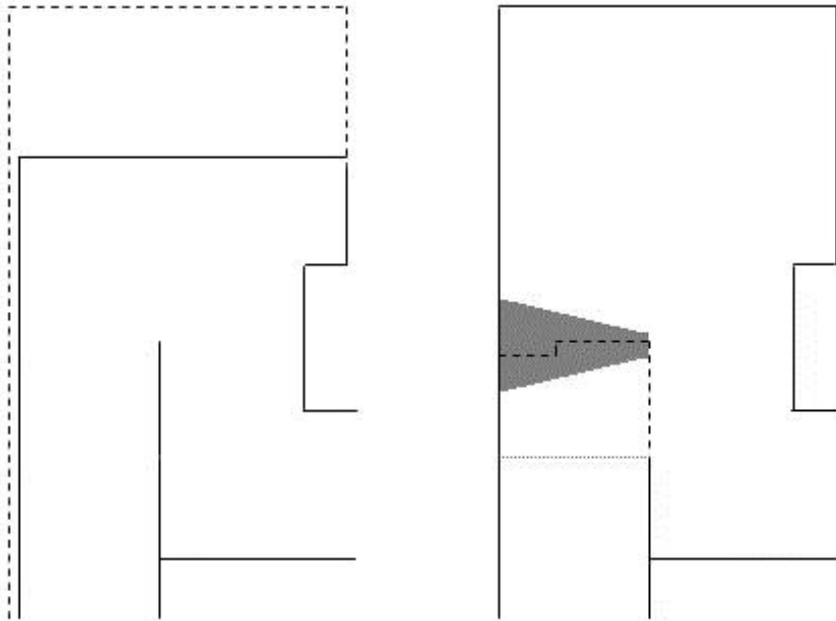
Machining after welding. Figure 2-12. Original and new joint.
